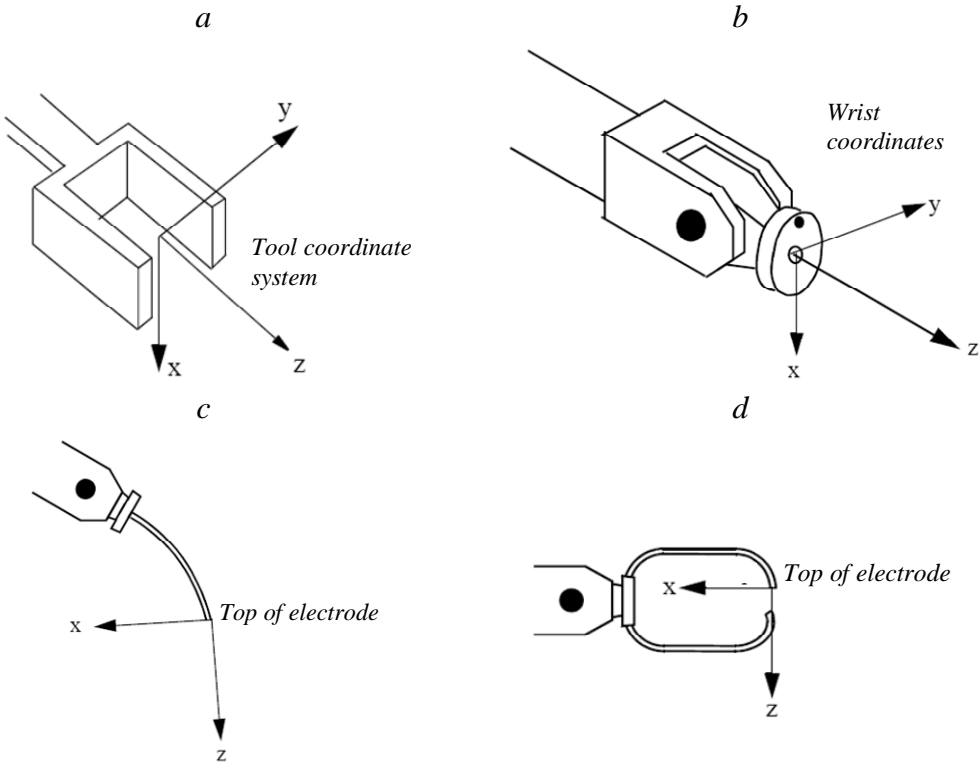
Tool and wrist coordinates a, b and use of these coordinates with arc and spot welding electrodes c, d
